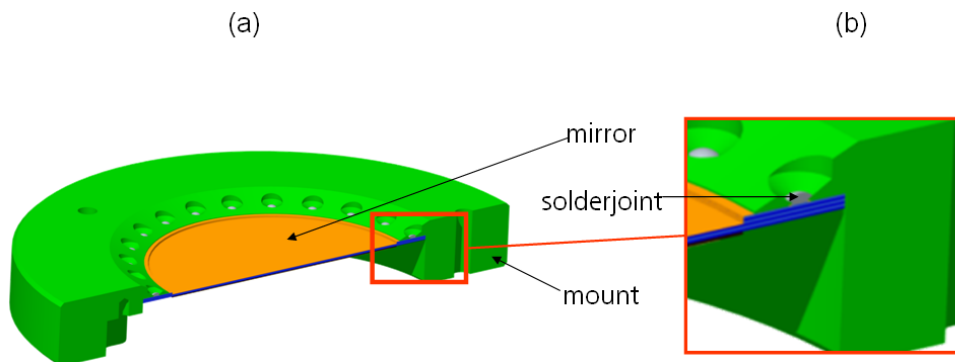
Mirror design concept. (a): cross section of mounted mirror membrane; (b): detail with mounting aid structures, mount and solder filled conical bores.
